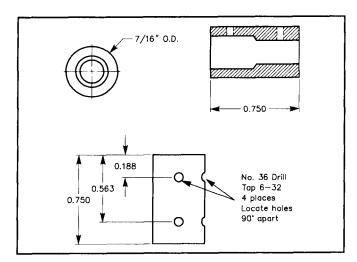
Coupling to adapt 3/16- to 1/4-in. shaft is made from 7/16-in. diam. aluminum rod.
